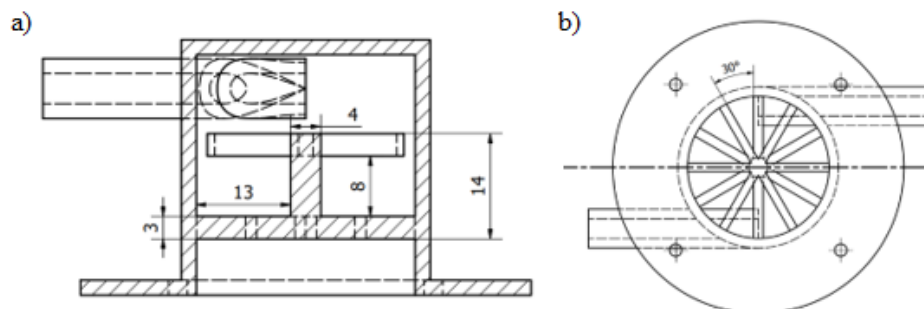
The chamber of an atomizer with insert set No. 2: a) cross-section, b) bottom view
